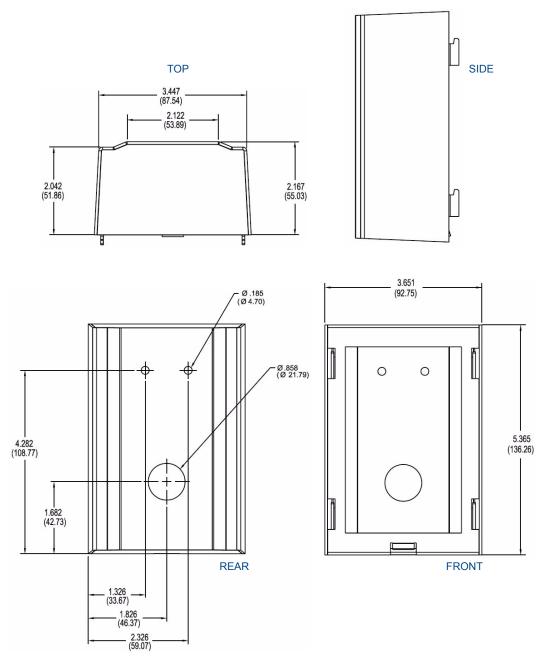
Surface Mounting Box Specifications - Top and Side Views
